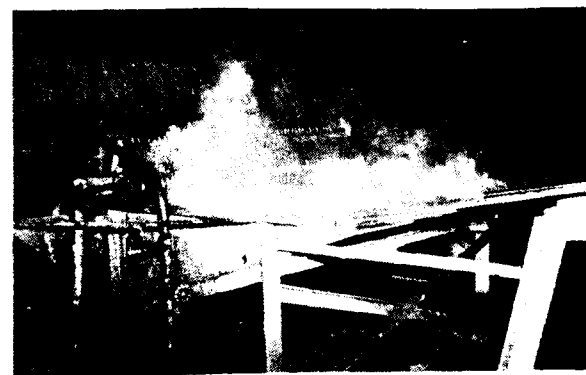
Rods after patenting at water quench. The quench cools the rod so that it will not "shrink" onto the take-up reel. This cooling also assists ease of handling. Very little scale is removed in this area.
